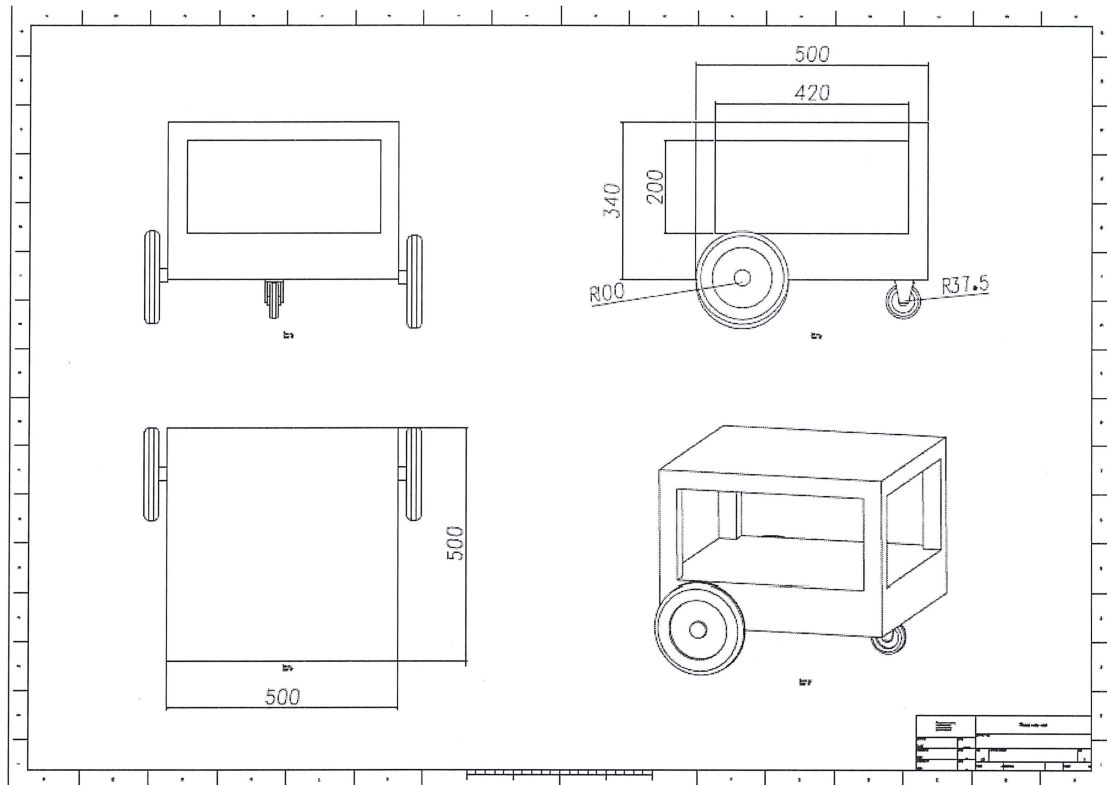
Orthographic view of the first design of wheeled mobile robot
